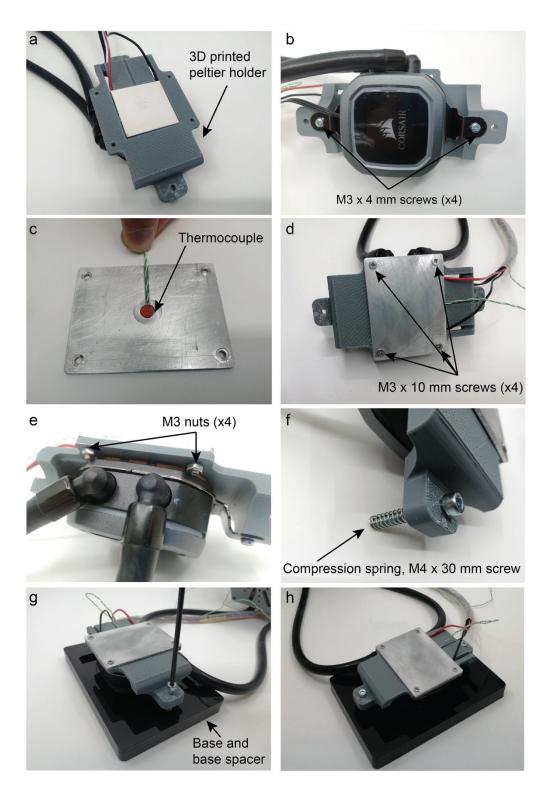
Installation of the thermoelectric module in the holder (a). Peltier holder attached to CPU cooling block (b). Thermocouple placed between Peltier element and bed aluminium plate (c). Aluminium plate attached to Peltier holder (d). Bed plate and Peltier holder (e). Compression springs provide counterforce to adjust height and to level the bed (f). Bed attached to laser cut base and base spacer (g). Finished assembly (h).
